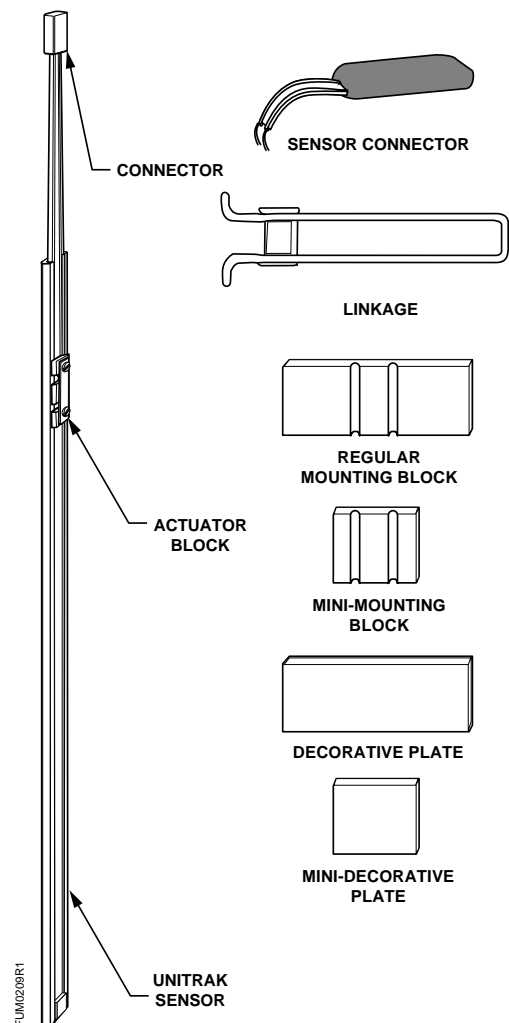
UniTrak® Sash Sensor Assembly Kit.
